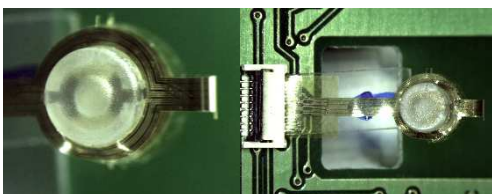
Assembled 3-axis thermal accelerometer mounted in the PCB (printed circuit board) for future characterization.
